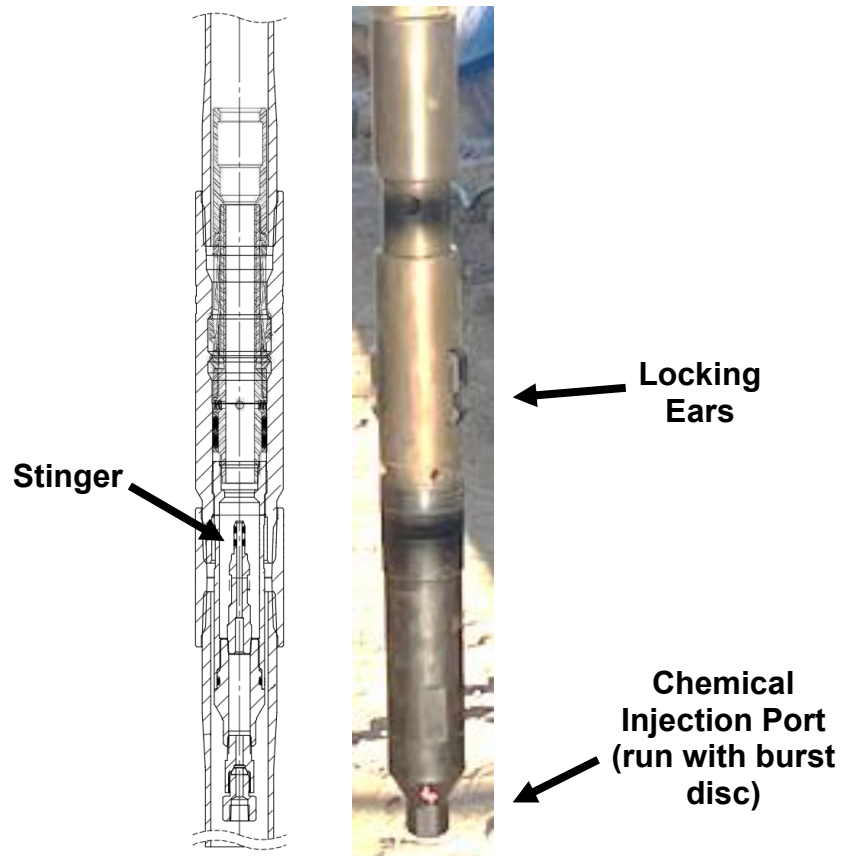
Lower assembly, run on slickline. The tool sets in an XN nipple in the tubing.
